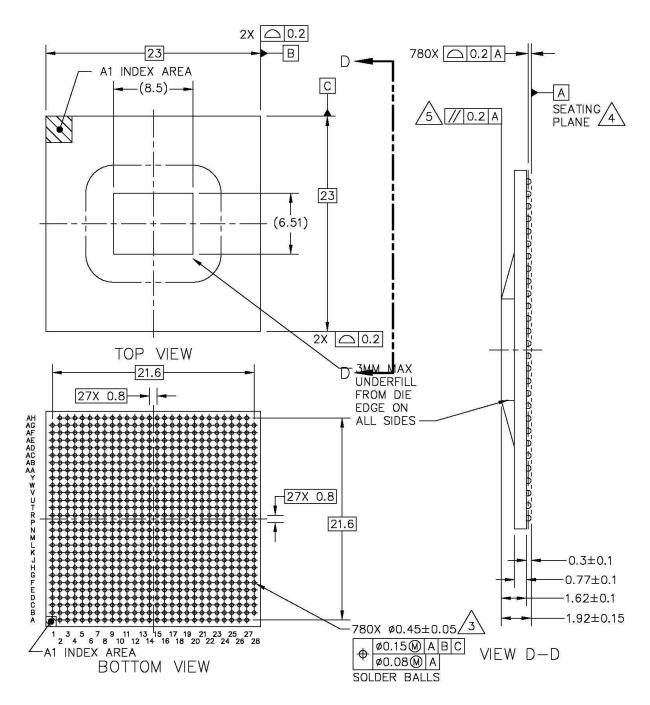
Mechanical dimensions of the FC-PBGA 23x23 mm (780 balls)
